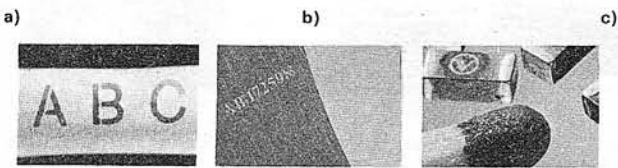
Examples of the excimer laser marking of materials: a) kapton wire, 2.2 mm o.d., b) aluminium, c) ceramic capsulated SMDs
